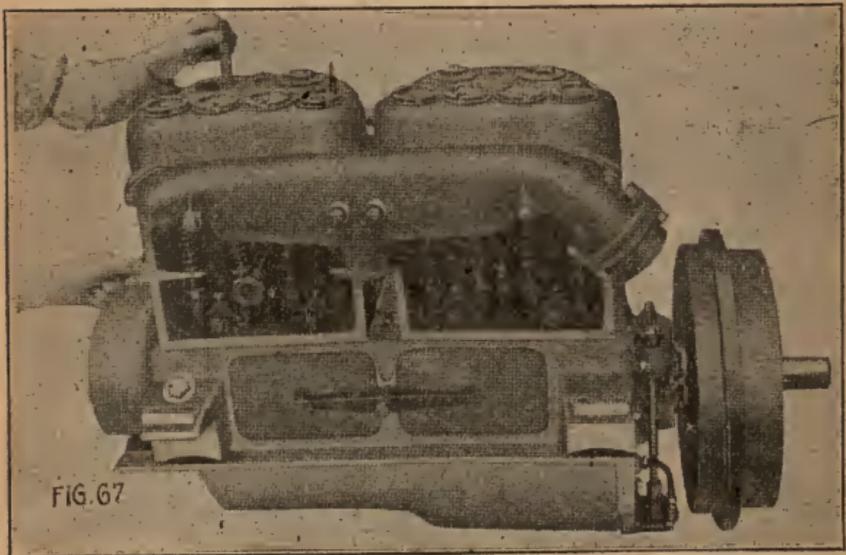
Adjusting tappet clearance on Waukesha engine.
